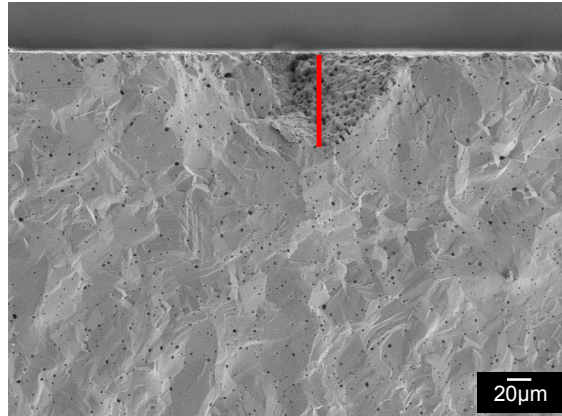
Fracture surface of LWO54 (batch CPT-D2  $\sigma_B=22$  MPa) after ring-on-ring test at room temperature showing a pore zone as failure origin.
